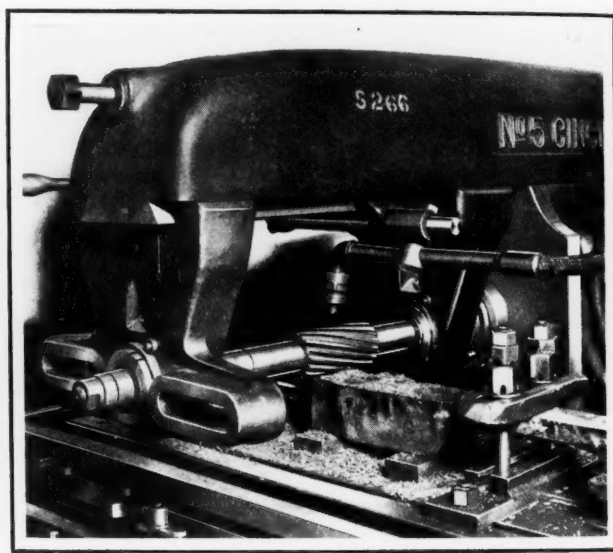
Typical Slabbing Operation Performed on Plain Milling Machine
